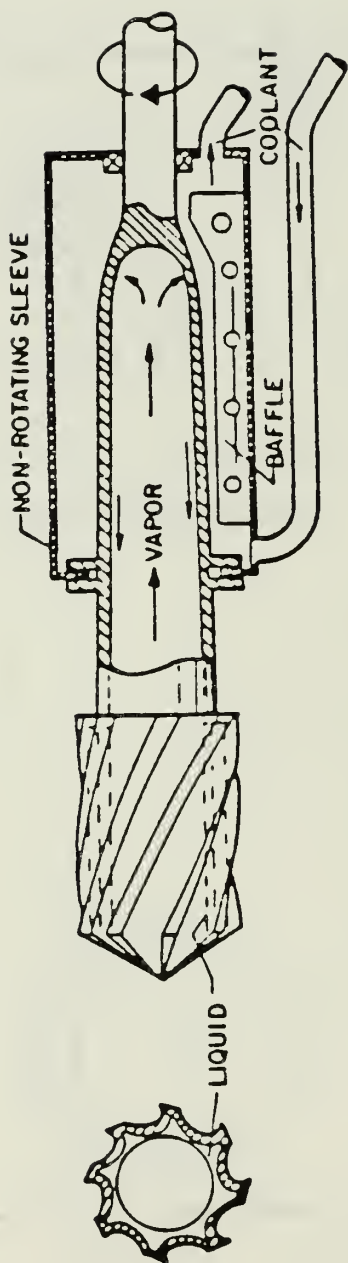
Drill Bit Cooled by a Rotating Heat Pipe [34].
